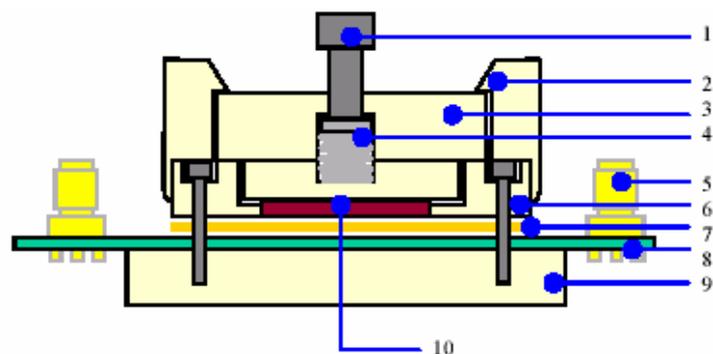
Prototype test socket [71] (1: Pressure Adjust; 2: Screw Clamp lever; 3: Device press plate; 4: DUT press spring; 5: SMA RF connector; 6: Device Guide; 7: Trampoline Contactor; 8: BT PCB; 9: Base Plate; 10: DUT)
